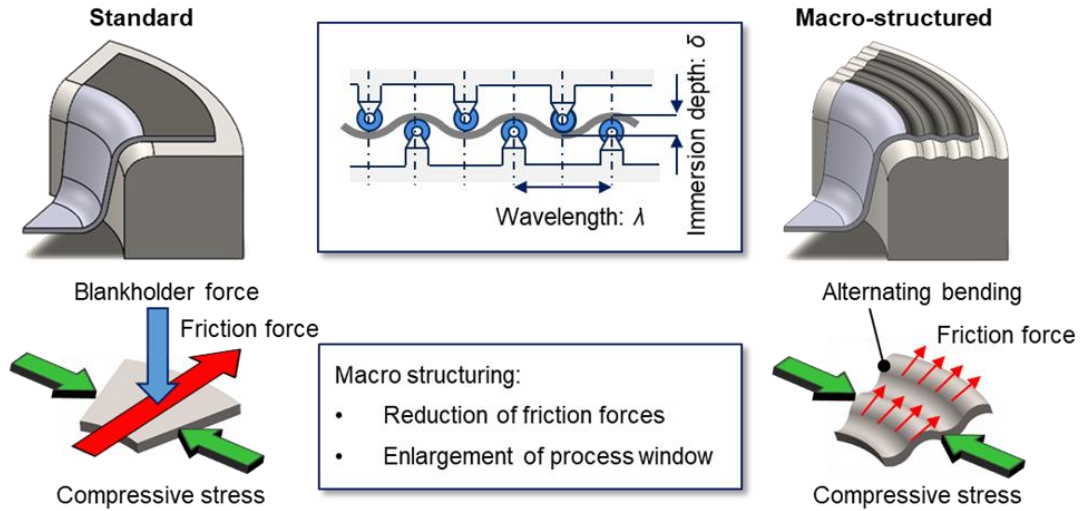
Macro structuring of deep drawing tool: reduction of friction forces and avoiding wrinkling by reducing the contact area in the flange area of deep drawing tools, from the standard tool setup to the macro structured tool setup for lubricant free deep drawing processes.
